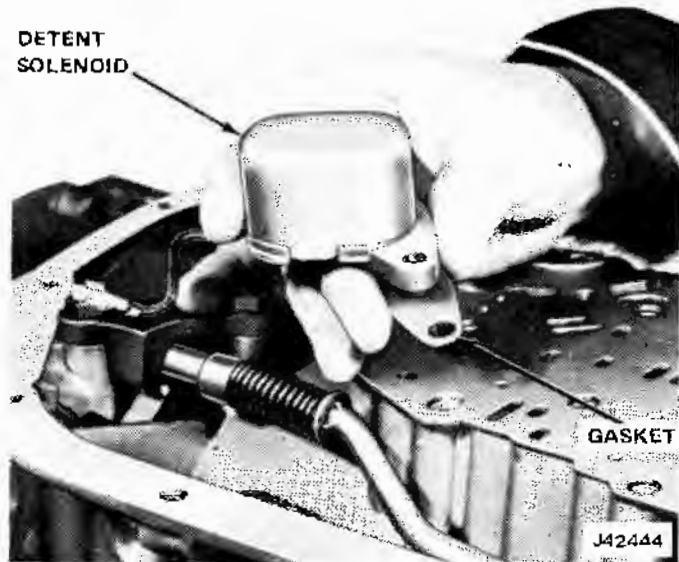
Detent Solenoid and Gasket Removal and Installation
